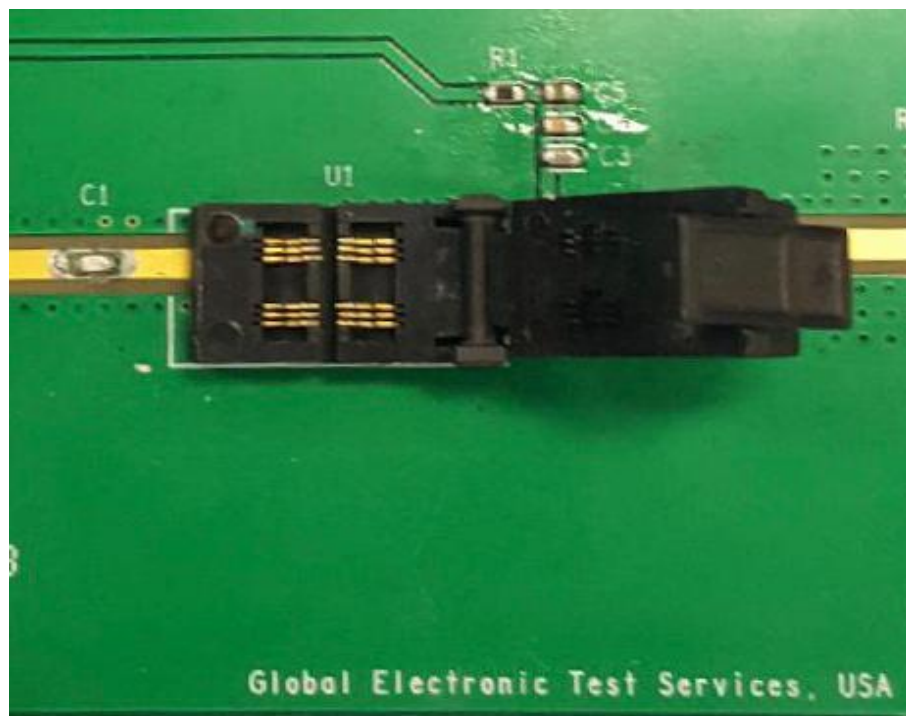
RF Test Socket on the PCB to Test Each of 6000 RFMD AG303-86 InGaP HBTs.
